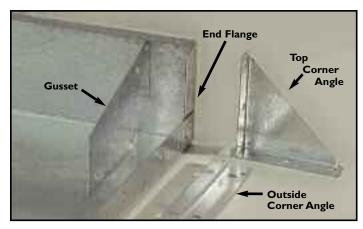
Outside corner angle, top corner angle, gusset and panel end flange shown.
